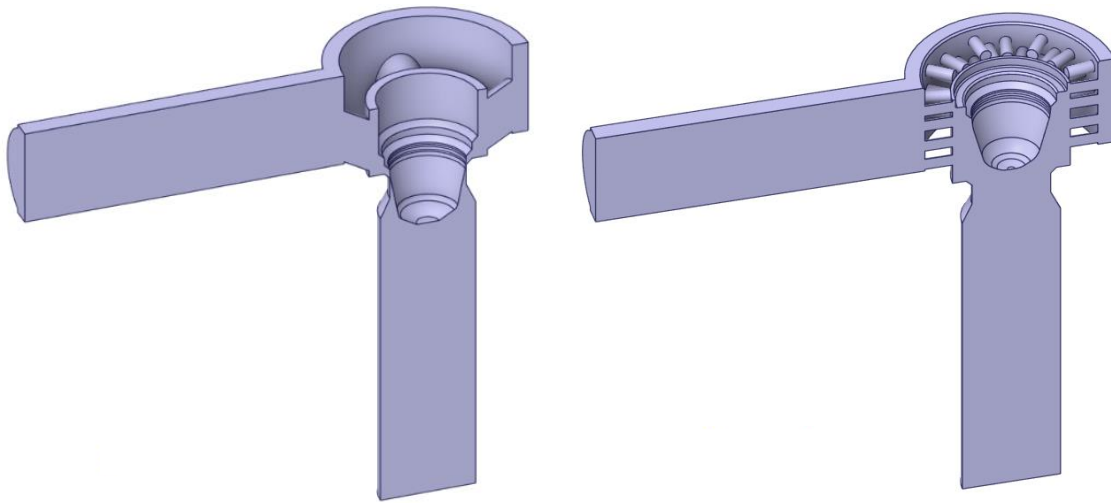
Simplified fluid domains: commercial valve (left), prototype valve (right)
